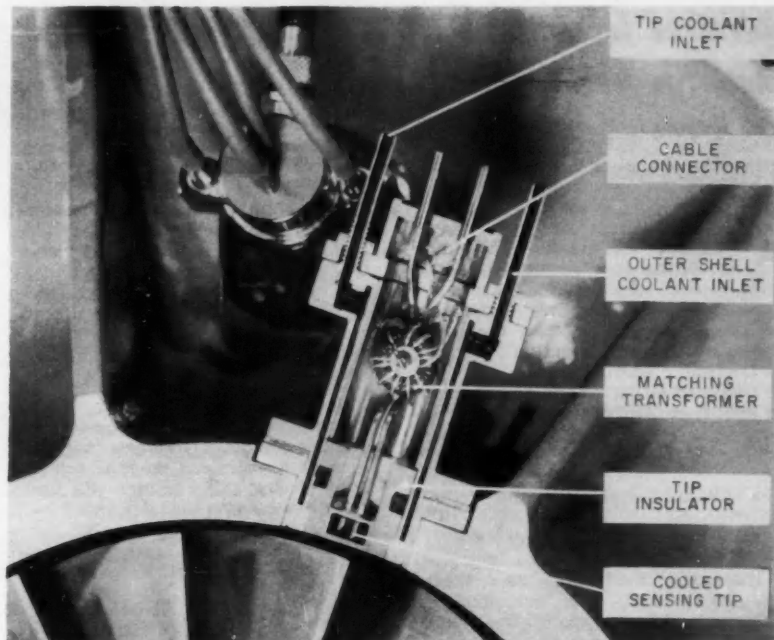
Cross-section of a double-cooled, capacitance-type, clearance pickup for turbomachinery.
